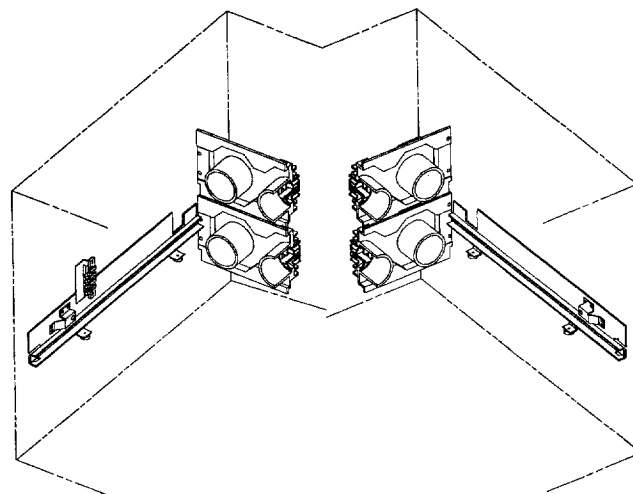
Fused Roll-Out Compartment Kit (position "C")
